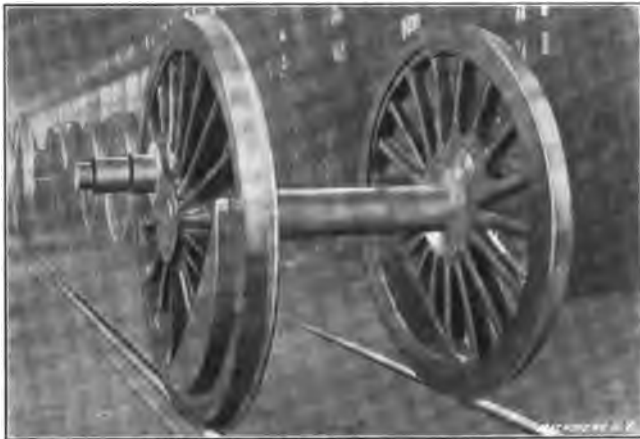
Completed Driving Axle and Drivers for Heavy Pennsylvania K-2 Type Pacific Passenger Locomotive
